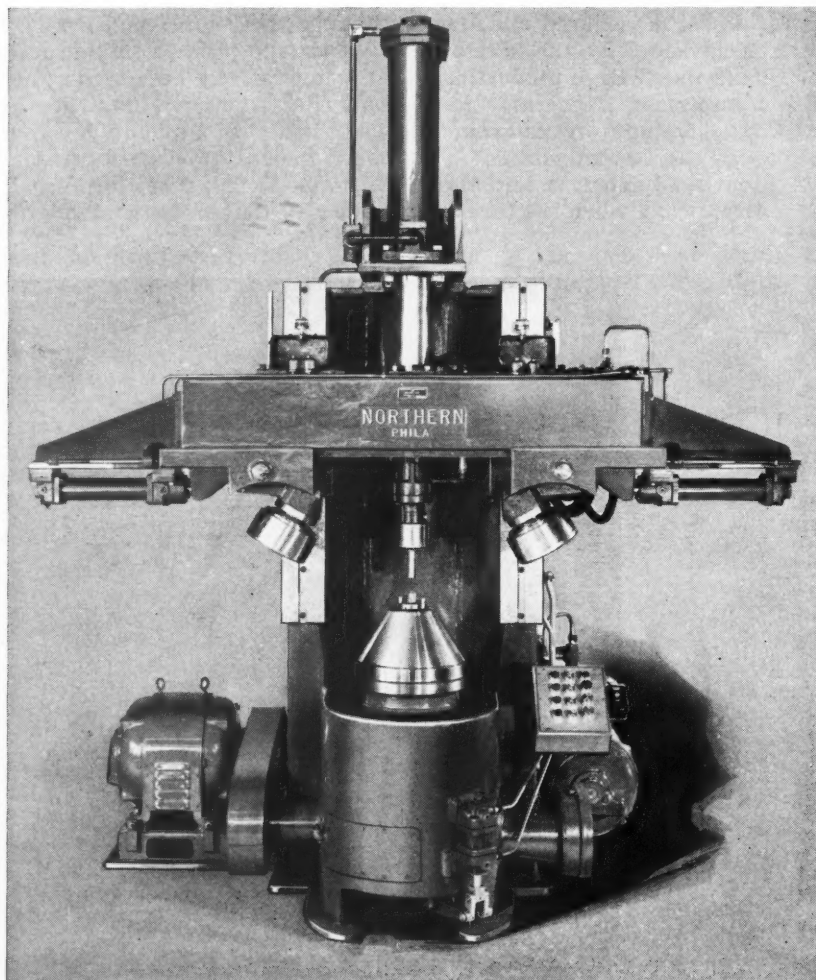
Metal spinning machine built by Northern Engineering & Machine Corporation
